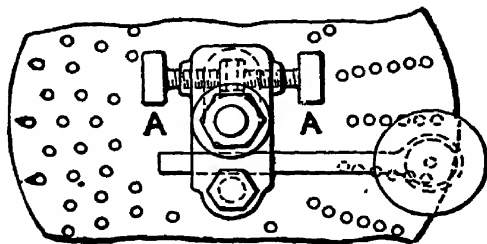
SHOWING METHOD OF ADJUSTING CRANK HANDLE
